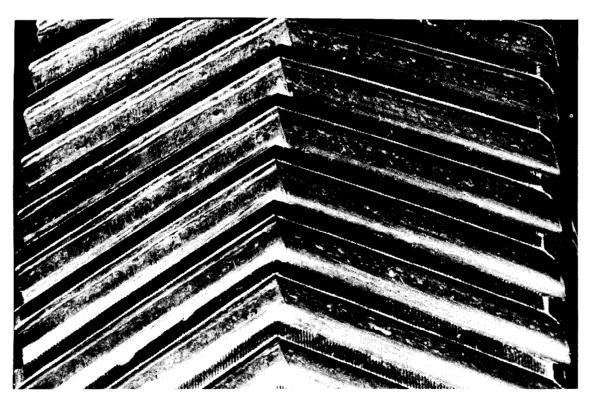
Gear tooth pitting, nodular iron, from torque overload.
